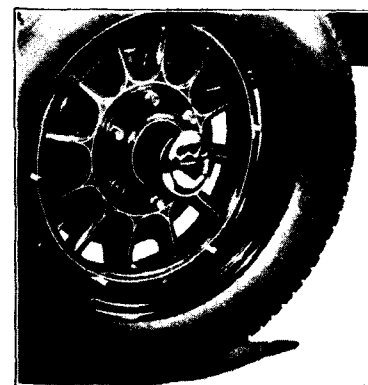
Then rotate the wheel until the valve stem approaches the bottom, when the rim and tire will roll free from the wheel and can be removed without lifting.
